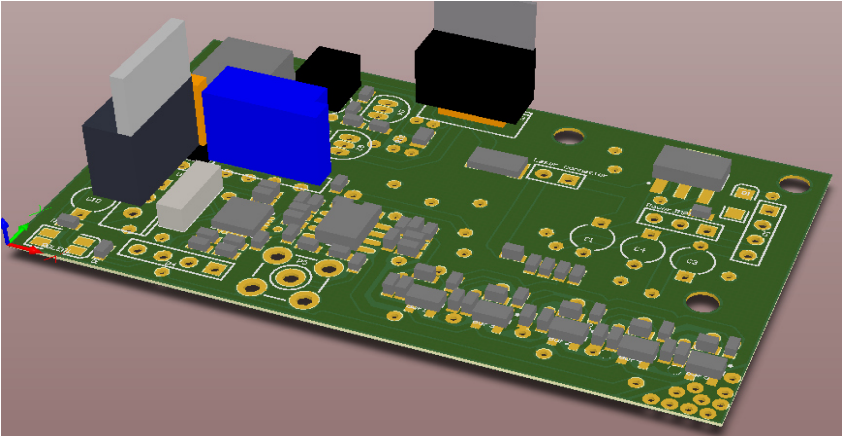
Showing a three dimensional view of the final PCB layout.
